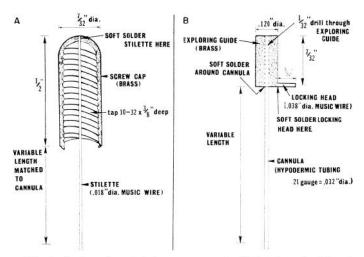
A: tamping stylet measurements. Stylet is soft-soldered into screw cap. B: details of exploring guide and locking head. Note that cannula is pushed through brass exploring guide and soft-soldered therein. Locking head, which forms a critical part of functioning system, is soft-soldered to base of the exploring guide.
